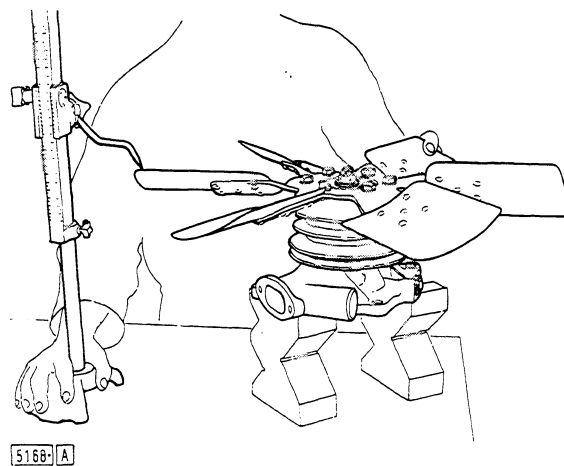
Checking for bent fan blades using a surface gauge (maximum bend allowance 2 mm or 0.078 in).
